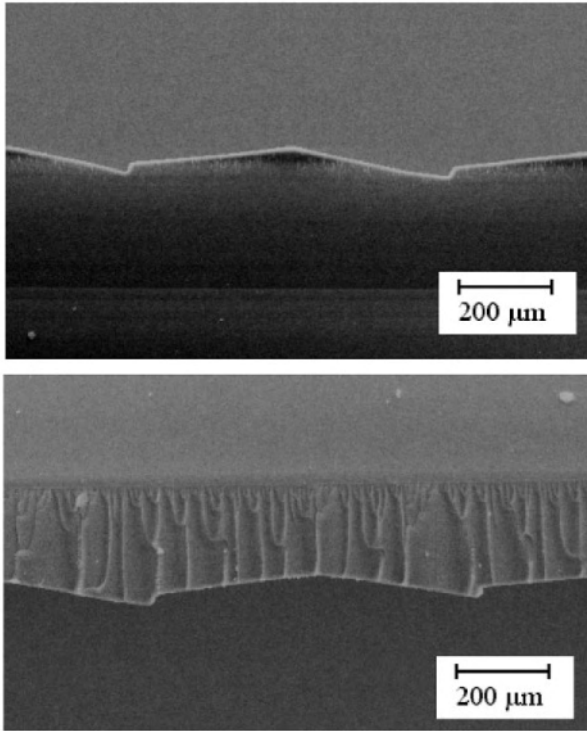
SEM-picture of the laser machined master and 6th replica [88].
